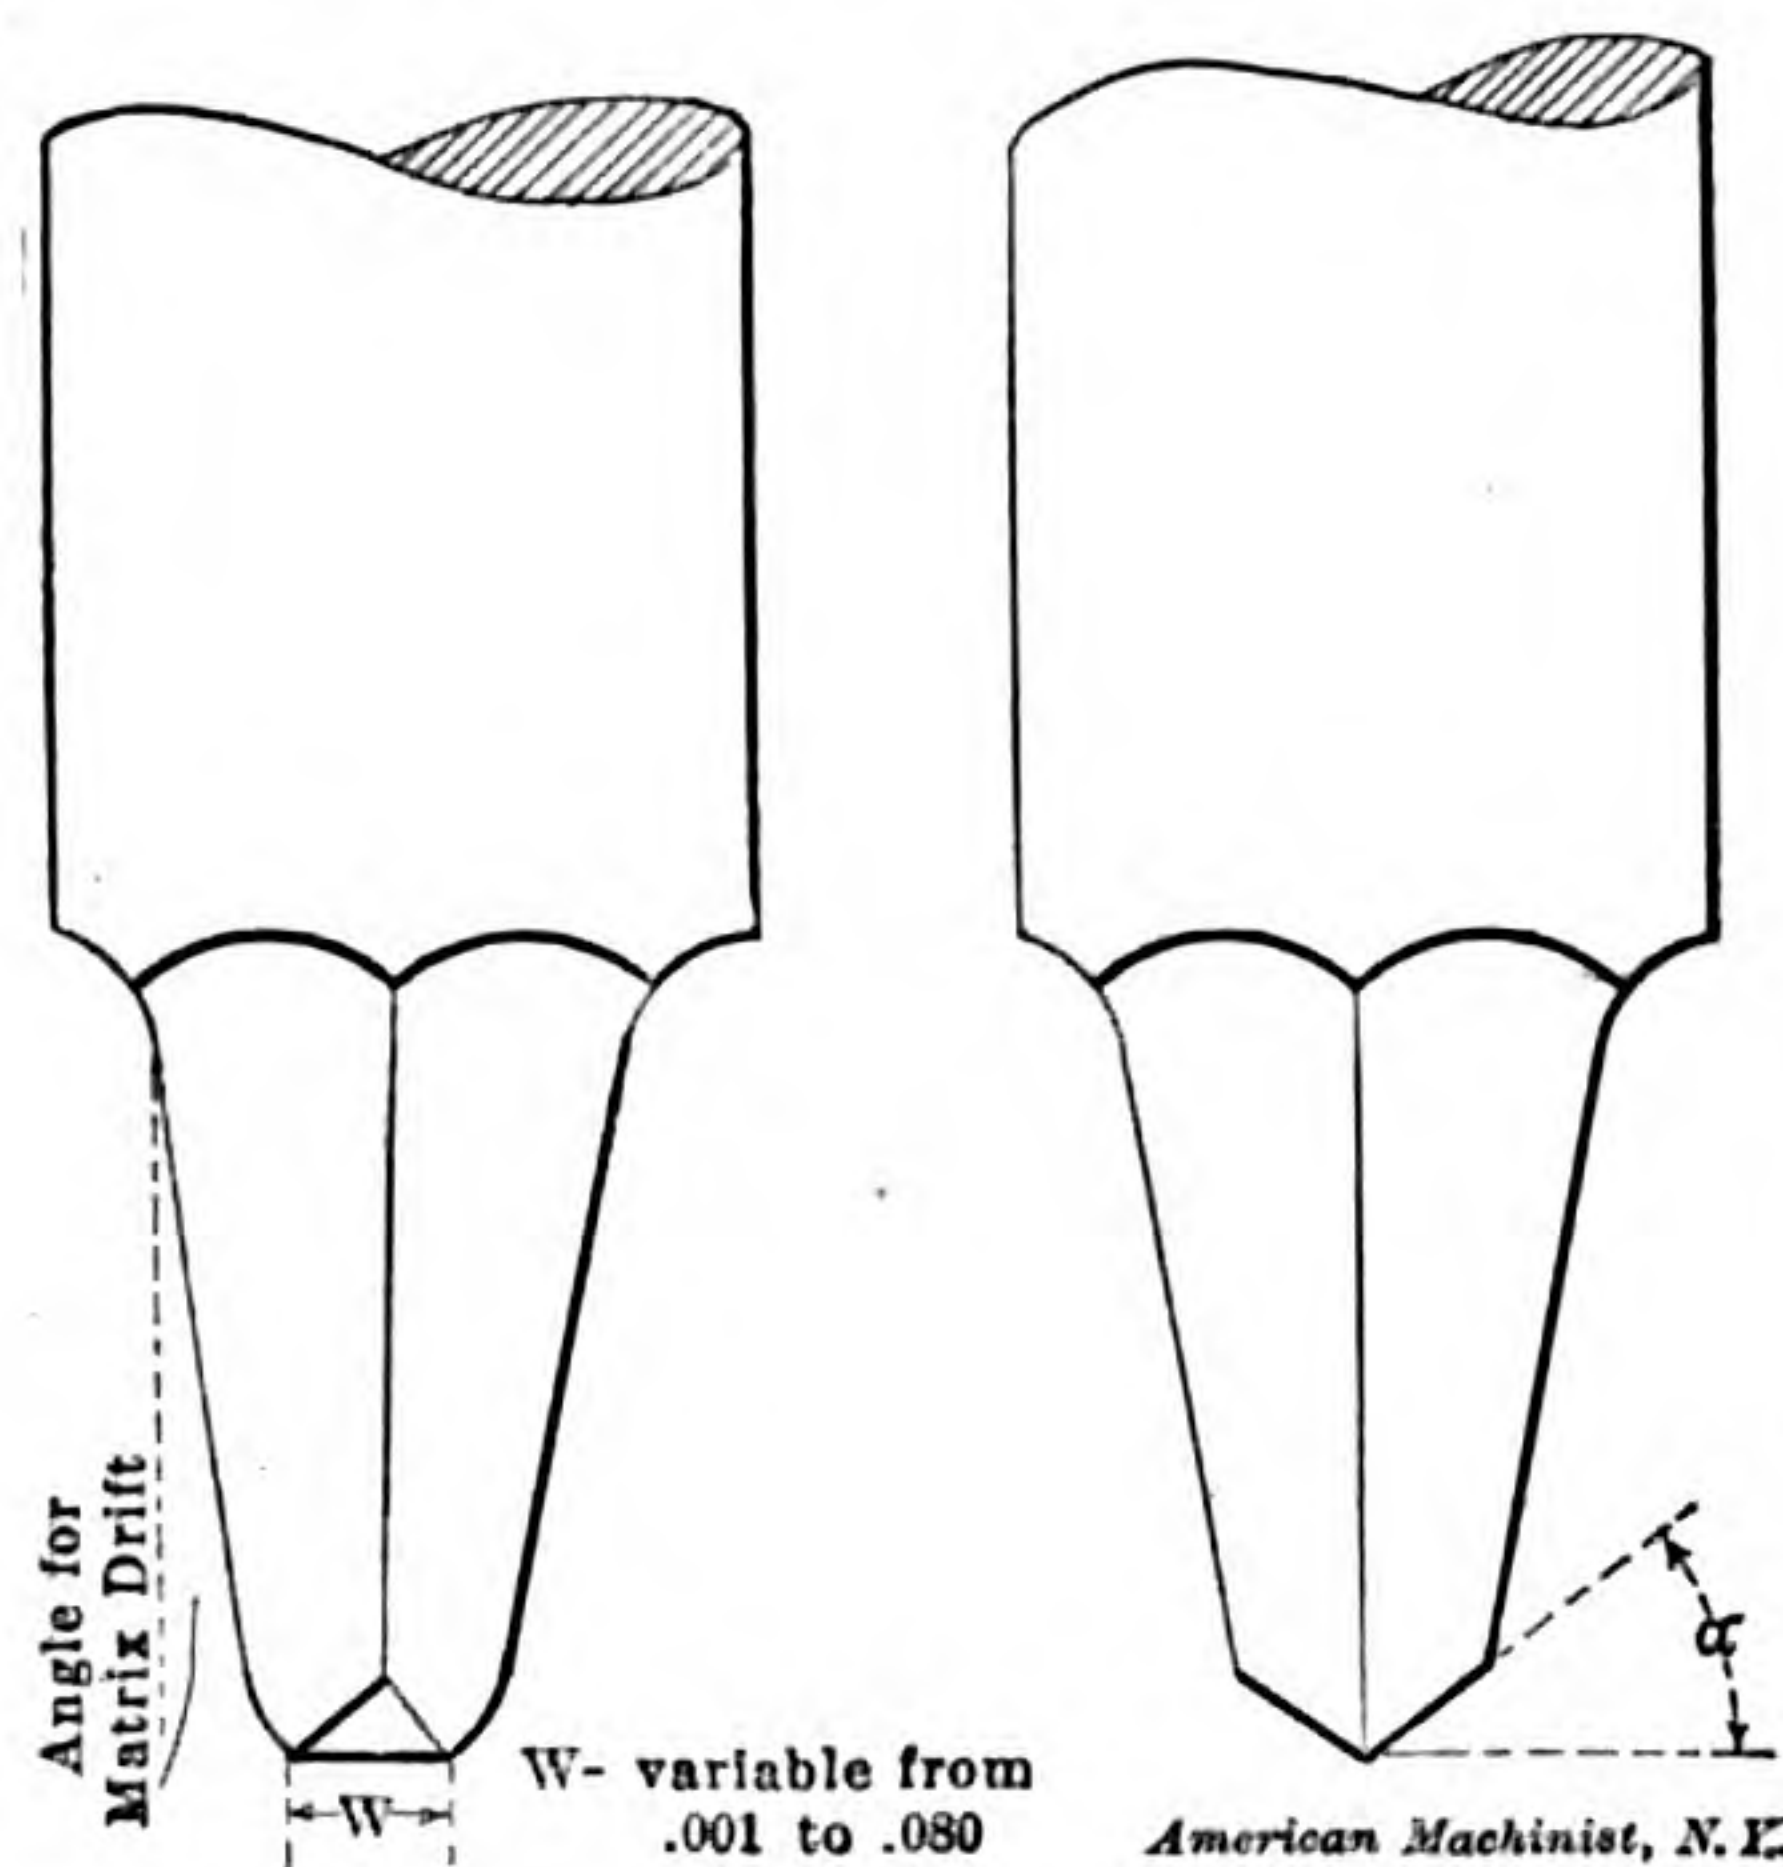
ENGRAVING TOOL SHOWING FACETS
